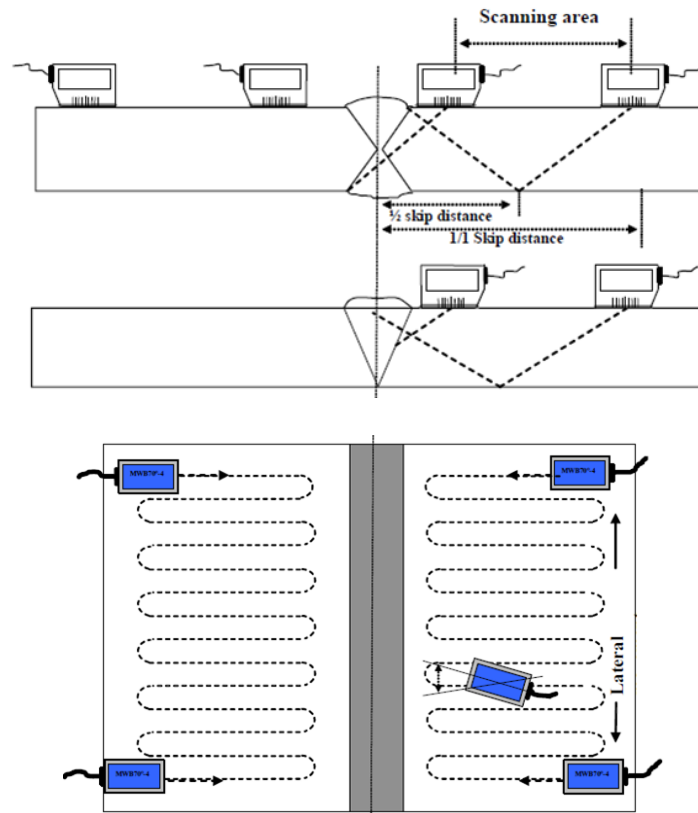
Probe movement for testing of butt joint welds (DVN 2012)
